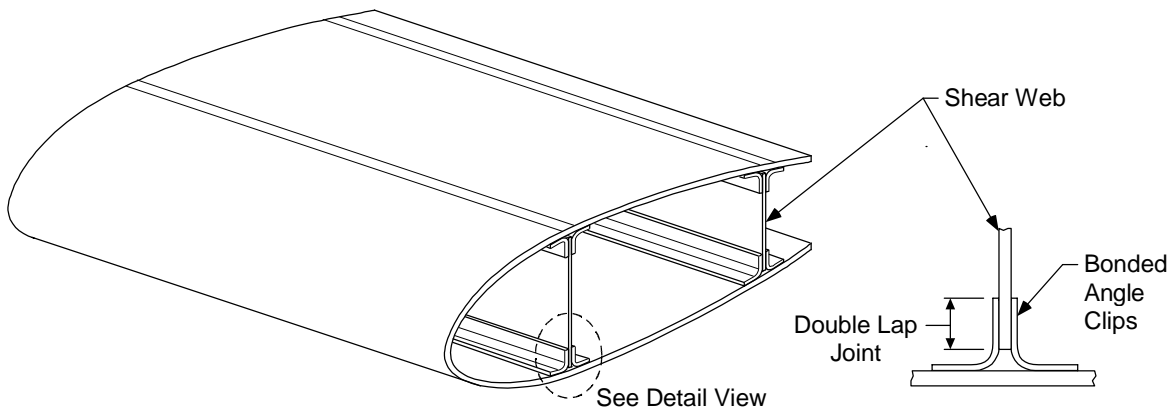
Shear Webs Forming Bonded Wing Box Assembly
